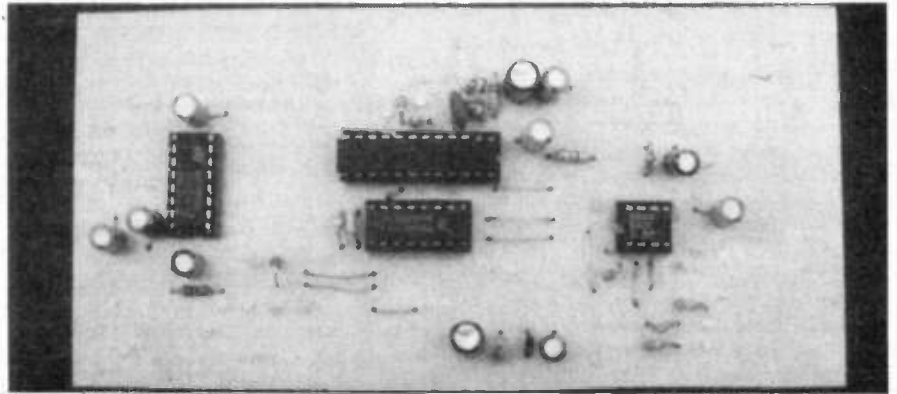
Interwiring details from the p.c.b. to the off-board components. The completed circuit board is shown below and should be housed in a metal case – size and type being left to individual constructors.
